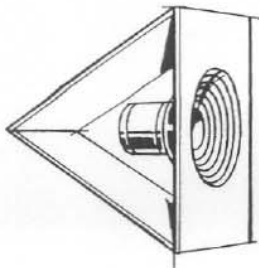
The Glued Assembly is lowered in place like a Gable Roof.
